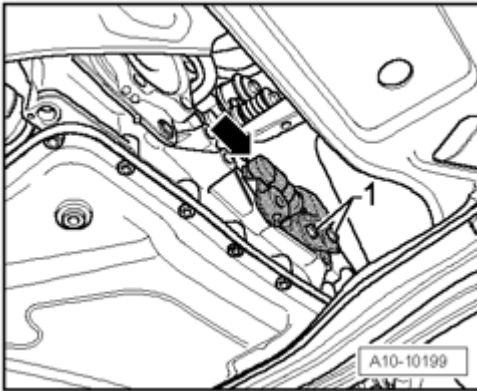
Removing Bolts For Support Bracket From Transmission & Disengaging Selector Lever Cable
